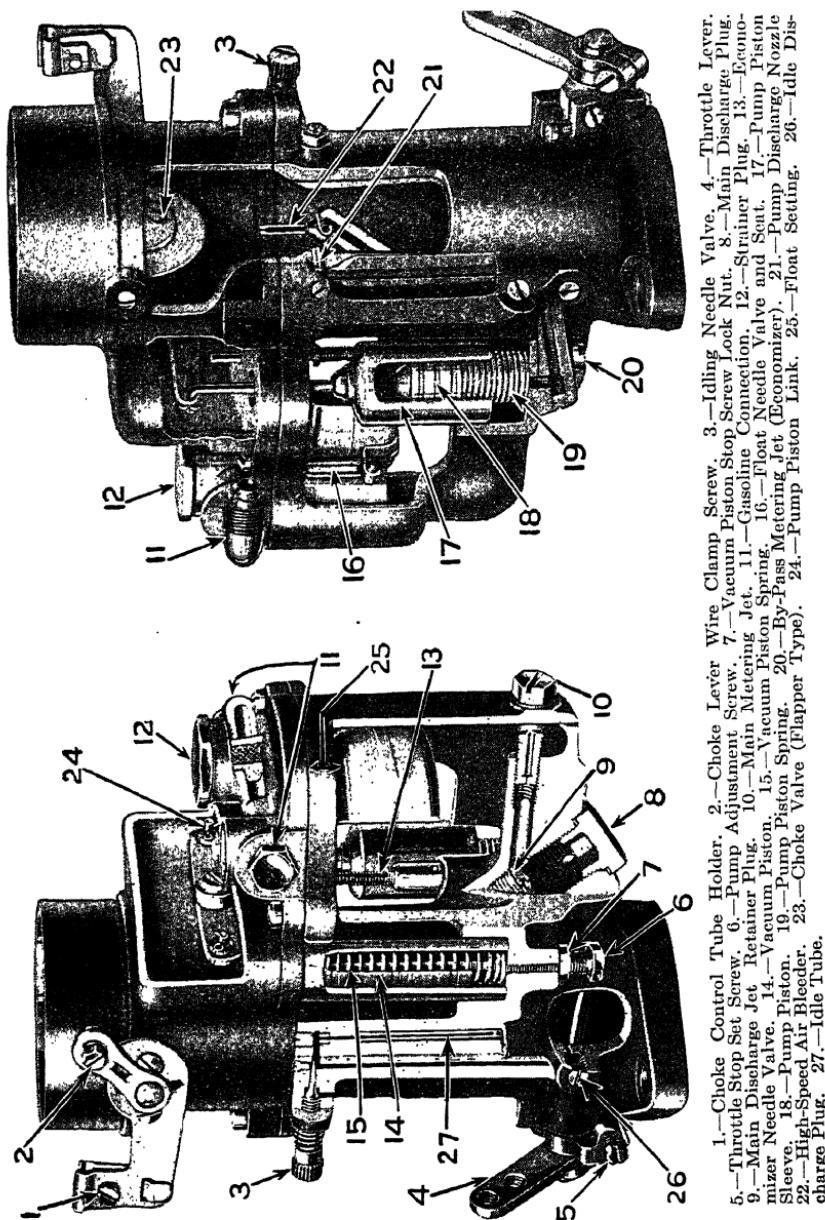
Sectional Views of the Stromberg Type of Downdraft Carburetor
